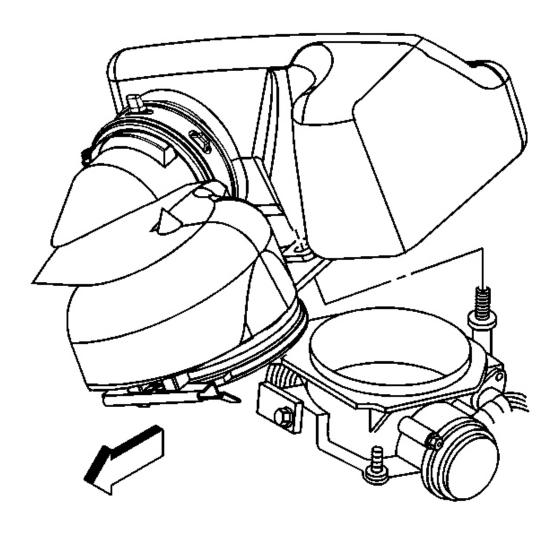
View Of Air Cleaner Outlet Duct Courtesy of GENERAL MOTORS CORP.
